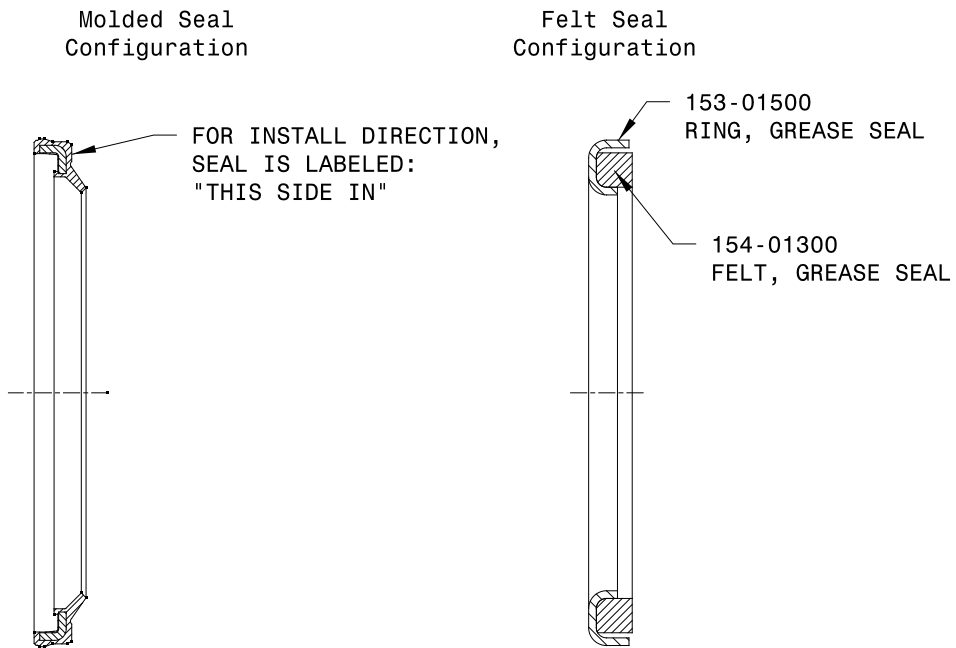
154-12400 Molded Seal to Felt Seal Comparison
